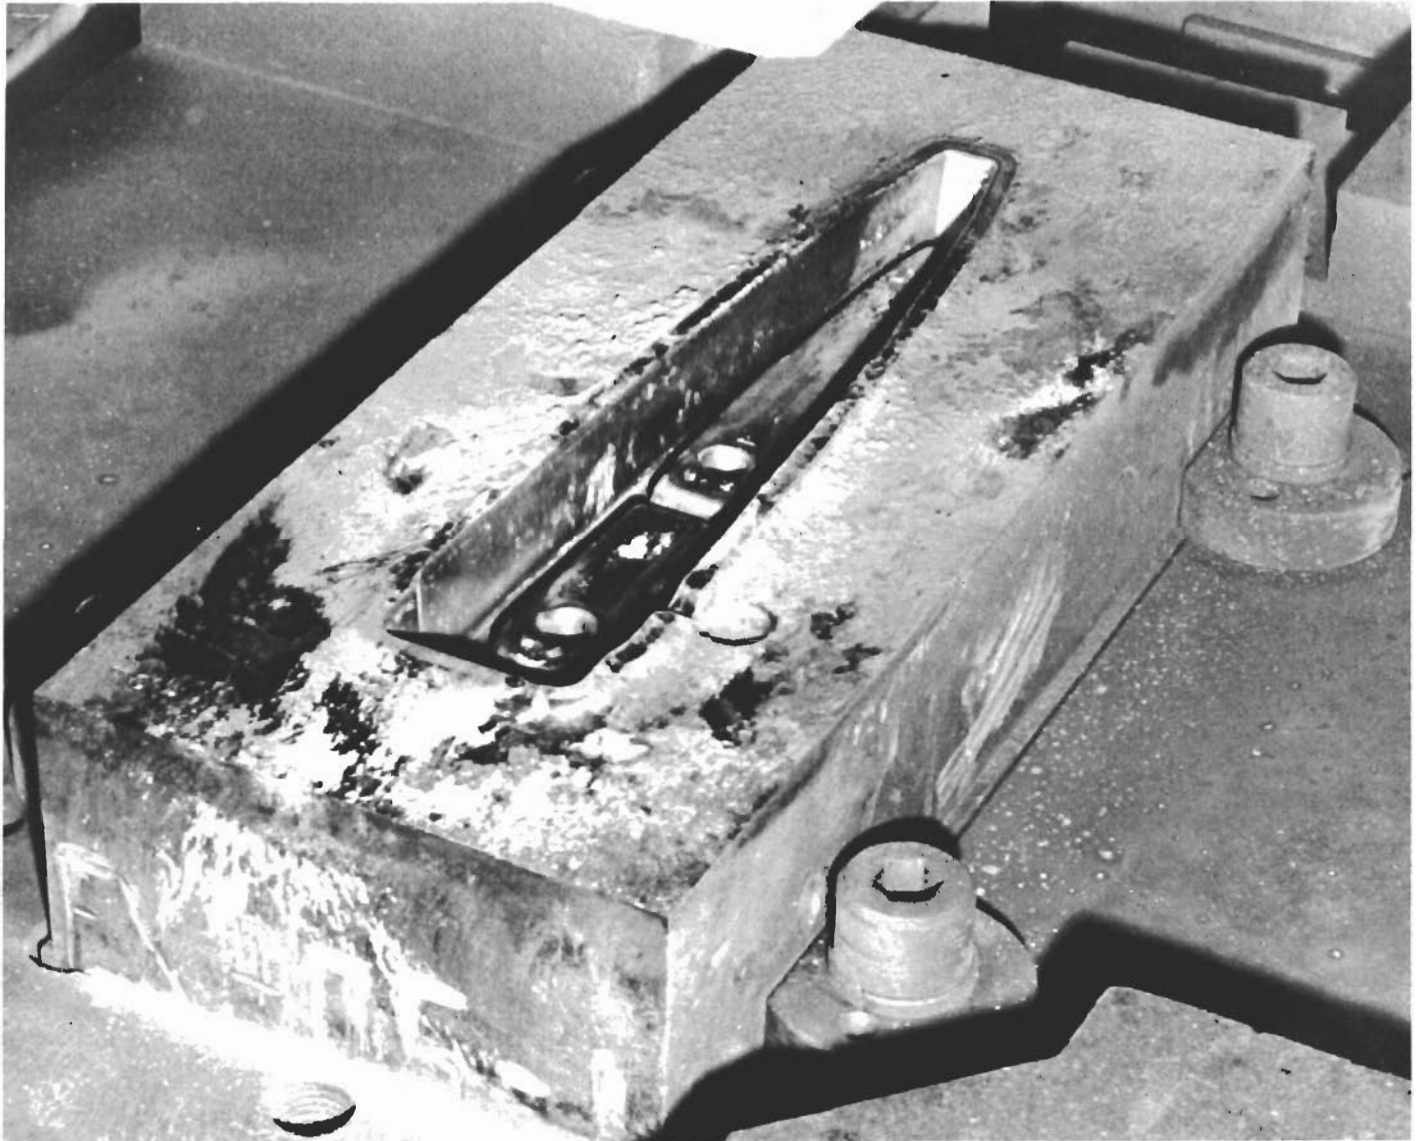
Upper Die for the Finish Forging Operation with the 4000 Ton Mechanical Press. Shown in Upper Half of Bolster after Completion of Program Forging Efforts and Removal of Bolster from the Press.
